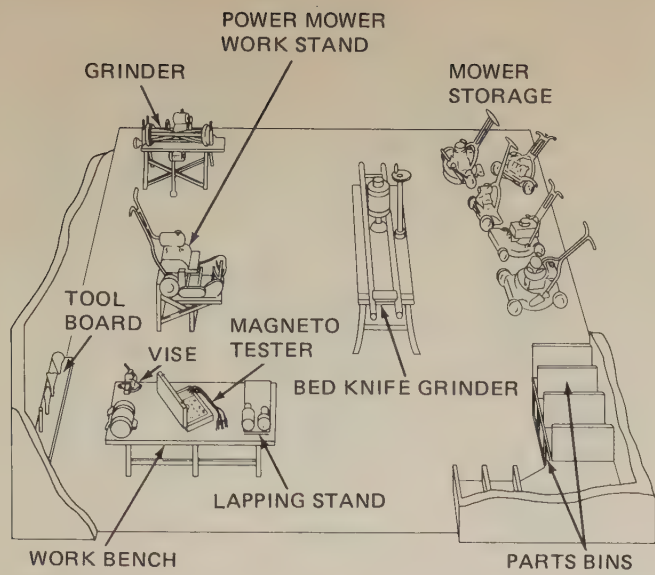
A typical layout for a lawn-mower repair shop.
